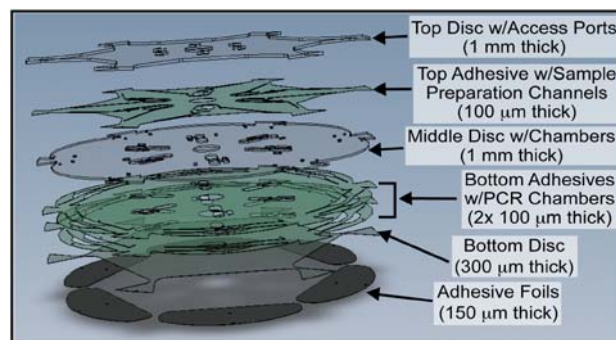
Schematic showing the layers involved in CD fabrication and assembly. The PCR microchambers consist of holes in the bottom adhesives, with solid plastic (middle disc) as the roof and adhesive foil as the floor.
